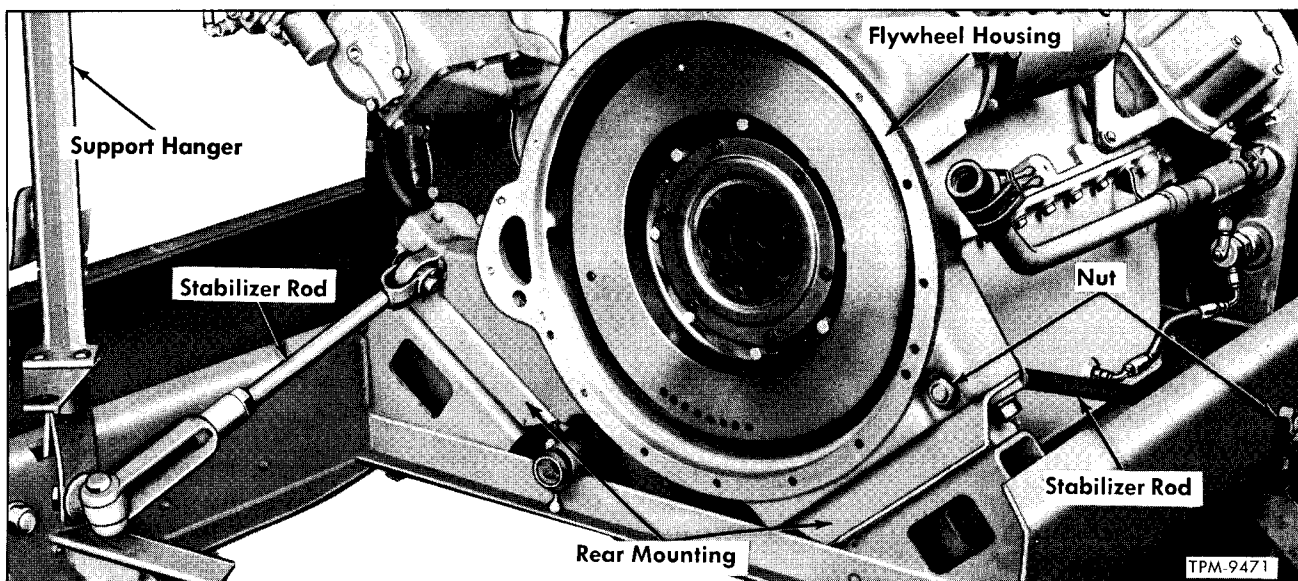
Engine Mounting and Stabilizer Rods—6 Cylinder Shown
